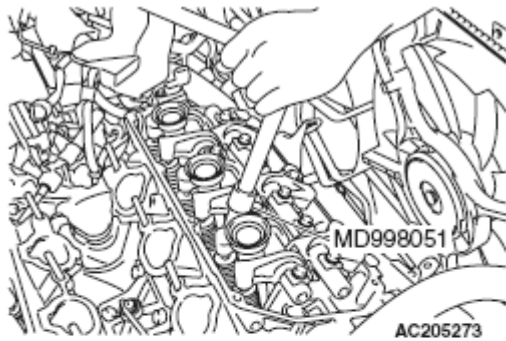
Removing Cylinder Head Bolts Using Special Tool MD998051
